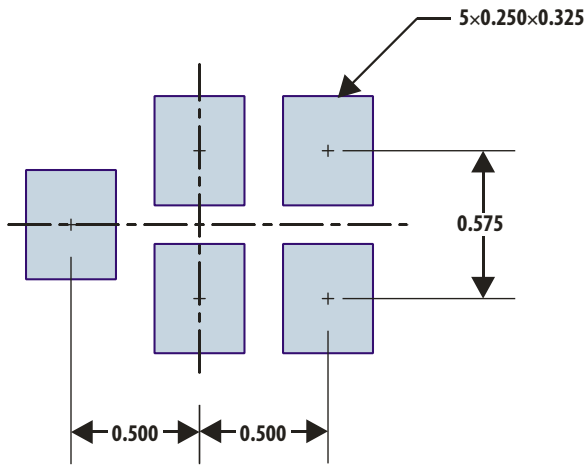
Recommended PCB Land Pattern (Dimensions in mm)
